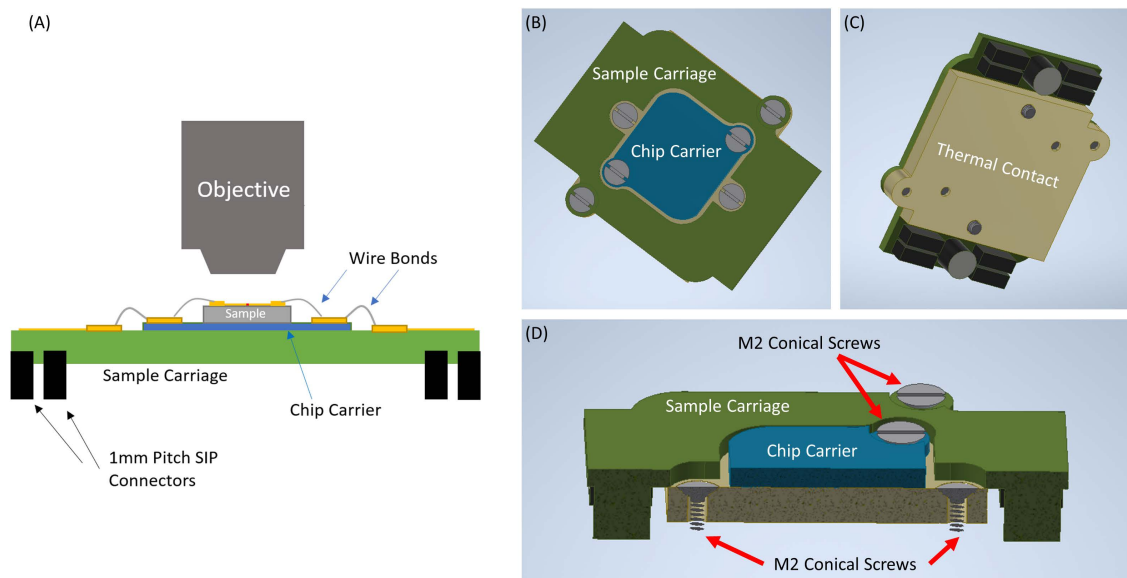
(A) Cross-sectional profile schematic of the Sample Carriage and Chip Carrier with a wire bonded sample and the Attocube objective. (B) 3D CAD top view of the Chip Carrier and Sample Carriage screwed into the Thermal Contact. (C) 3D CAD bottom view of the Thermal Contact with the connectors extended on the side. (D) 3D CAD cross-sectional profile of the sample system. Conical M2 screws secure the Sample Carriage and Chip Carrier boards to the Thermal Contact. Two additional M2 conical screws are placed in the drilled holes of the Thermal Contact. These are positioned such that they can be screwed directly into the Attocubes or the Thermalization Plate in Fig. B.10. NOTE: All screws are shown as conical flat heads, but in practice we only use conical hex heads.
